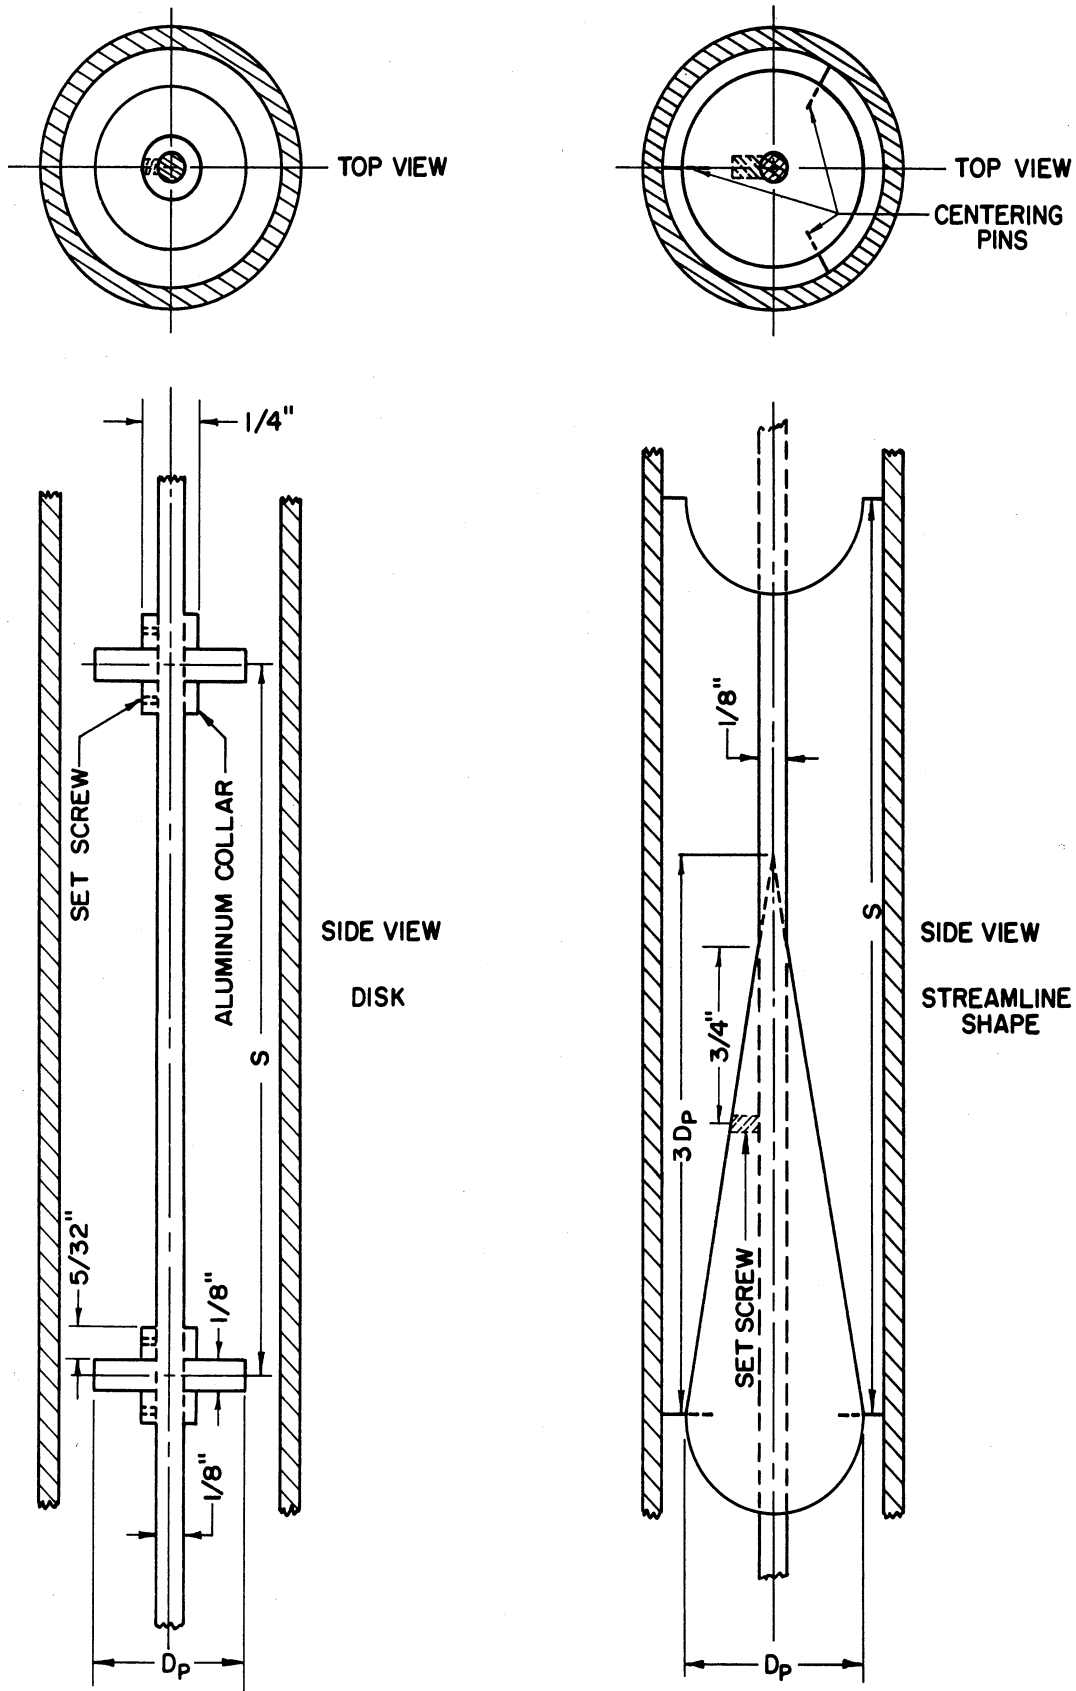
Diagram of Disk and Streamline Shape Showing Relative Dimensions and Method of Mounting.
